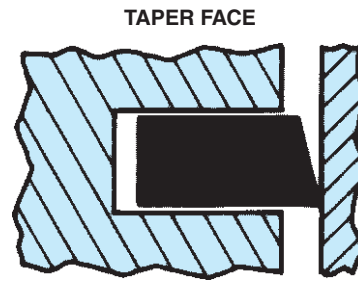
The taper face ring provides good oil control by scraping the cylinder wall. This style of ring must be installed right side up or the ring will not seal and oil will be drawn into the combustion chamber.
